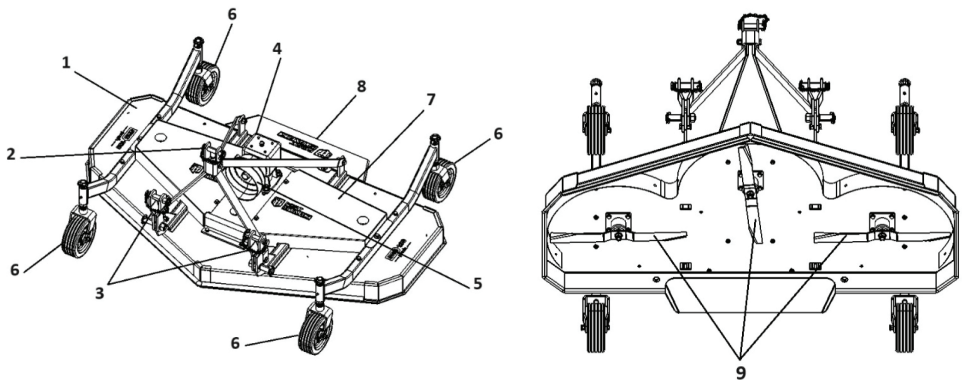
Rotary mower – general structure: 1 – frame, 2 – top link, 3 – lower link, 4 – bevel gear, 5 – power-input connection (PIC) guard, 6 – support wheels, 7 – belt drive cover, 8 – rear discharge chute, 9 – blades
